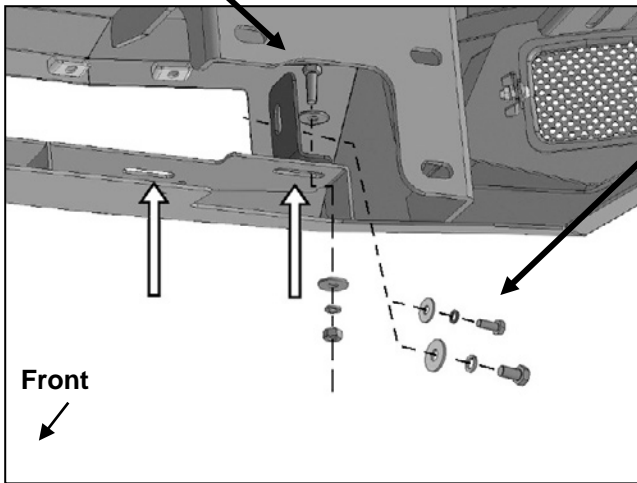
Attach Mesh Fill Panels as desired to fill unused openings for lights (lights not included). Passenger/right side illustrated
